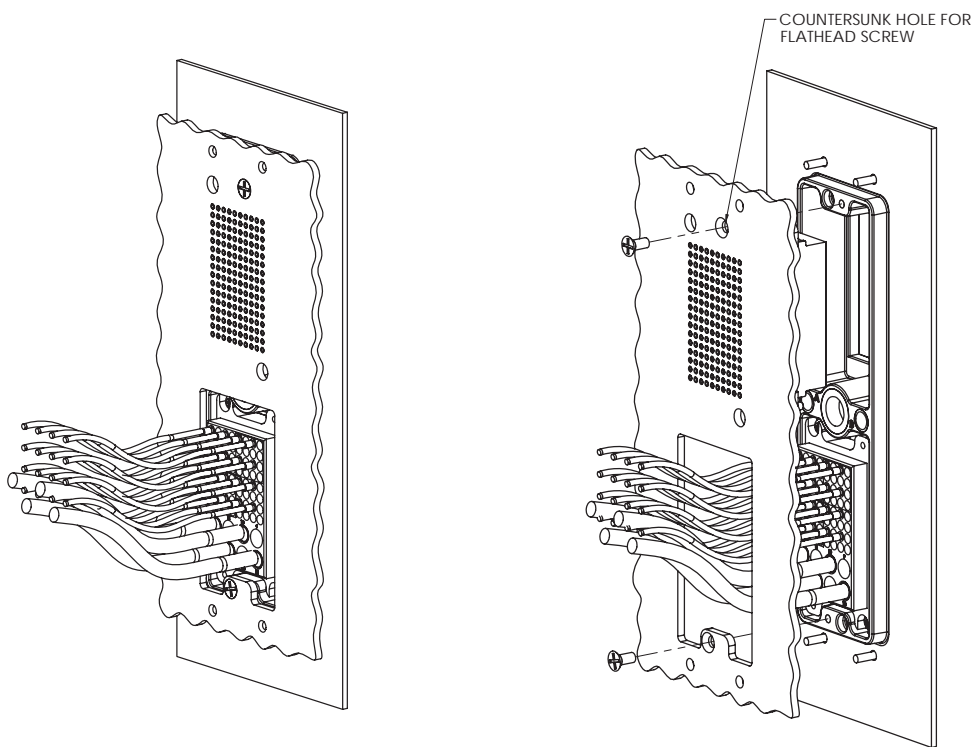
Figure D. User can use flathead screws to mount the PCB as shown. This can be done when no strain relief is required.
